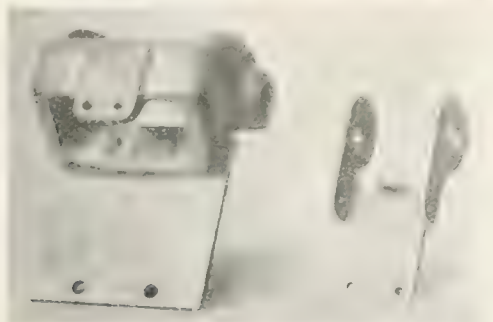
COMPARISON OF CAST AND PUNCHED PARTS. Indicating the difference in the cost of labor involved in the manufacture.
